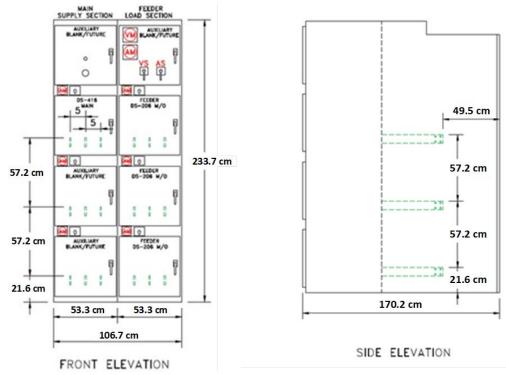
Drawing of DS Switchgear as procured (all drawing dimensions in "centimeters")
